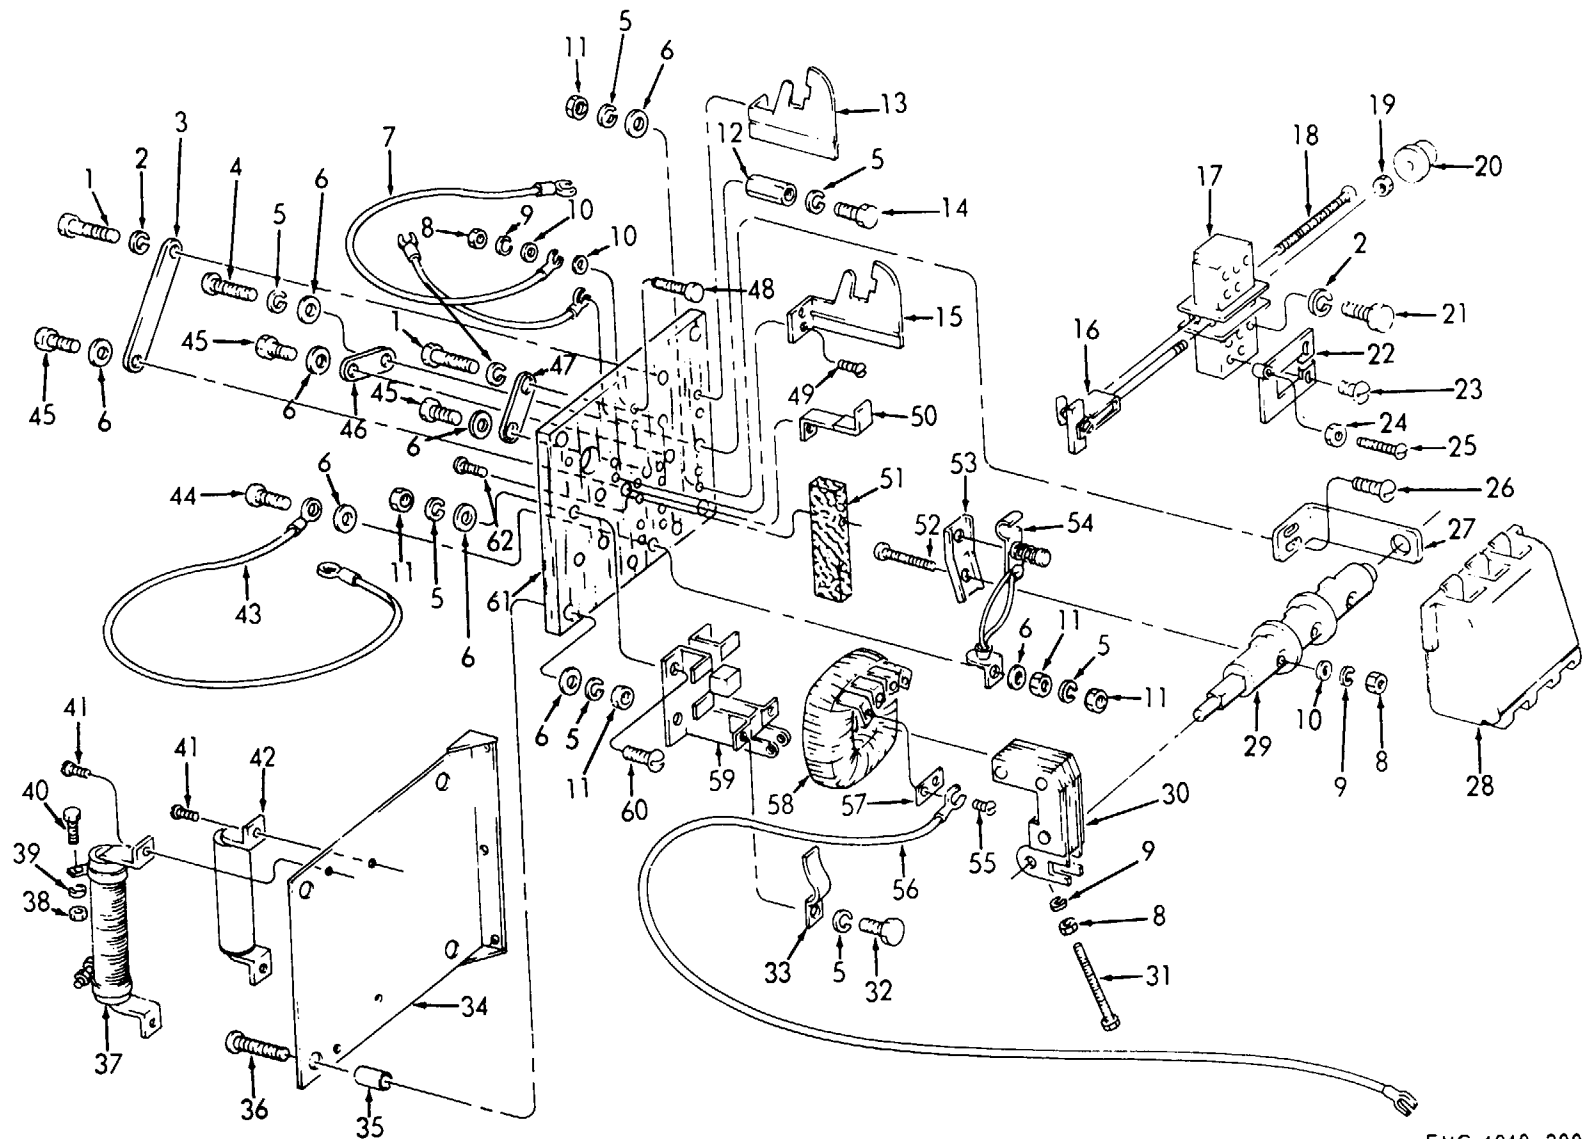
Ten-range switch and field rheostat, disassembly and reassembly.
